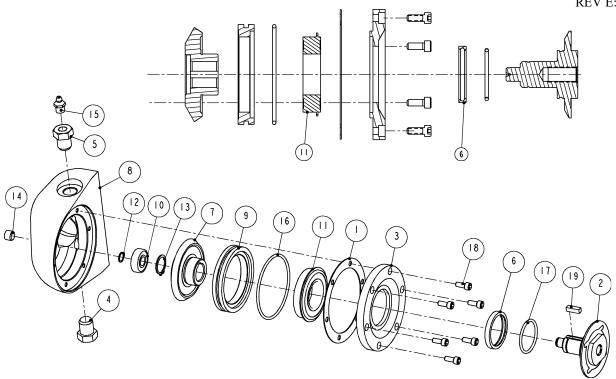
1302530: NOSE ASSEMBLY, STANDARD TORQUE
